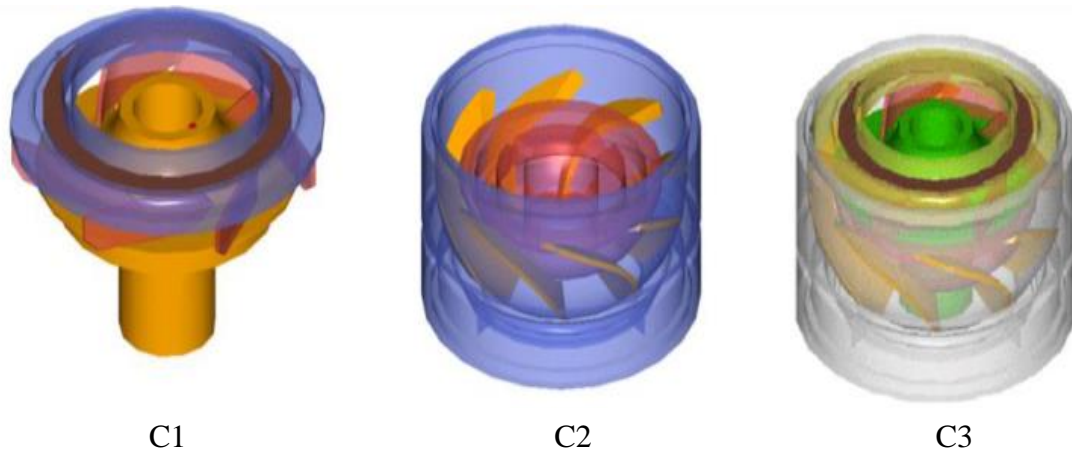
3D Drawing of Impeller (C1), Entire Geometry (C2), and Entire Geometry with Extended Blades (C3) [13]
